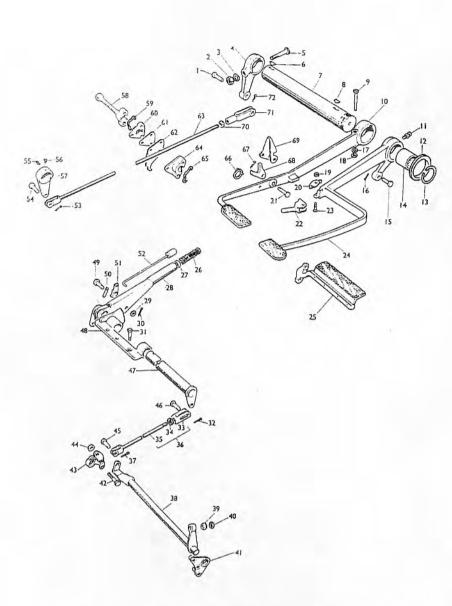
EXPLODED VIEW OF BRAKE LINKAGE
